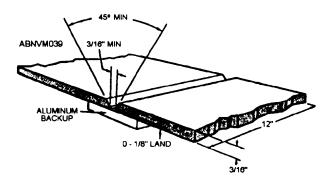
Joint design flat-position single-pass butt welds in aluminum sheet.
